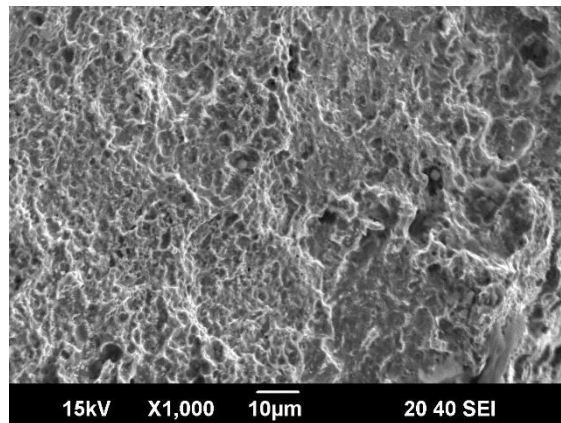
Fracture surface for one of the samples tested in L-gas blend.
